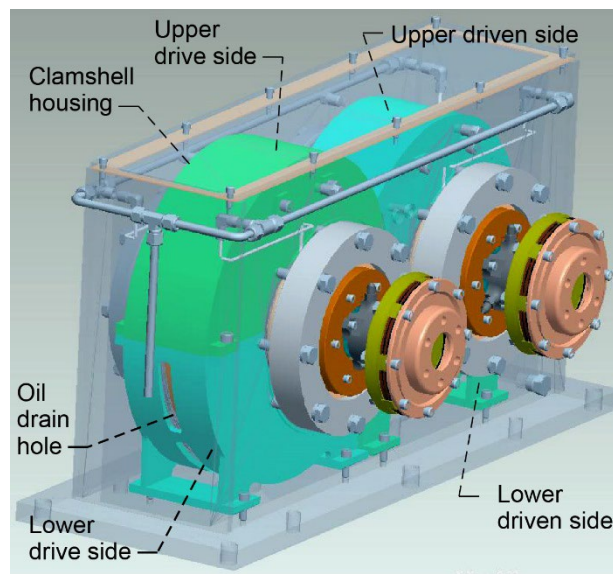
Test gearbox with axial and radial shrouds in clamshell housing.
